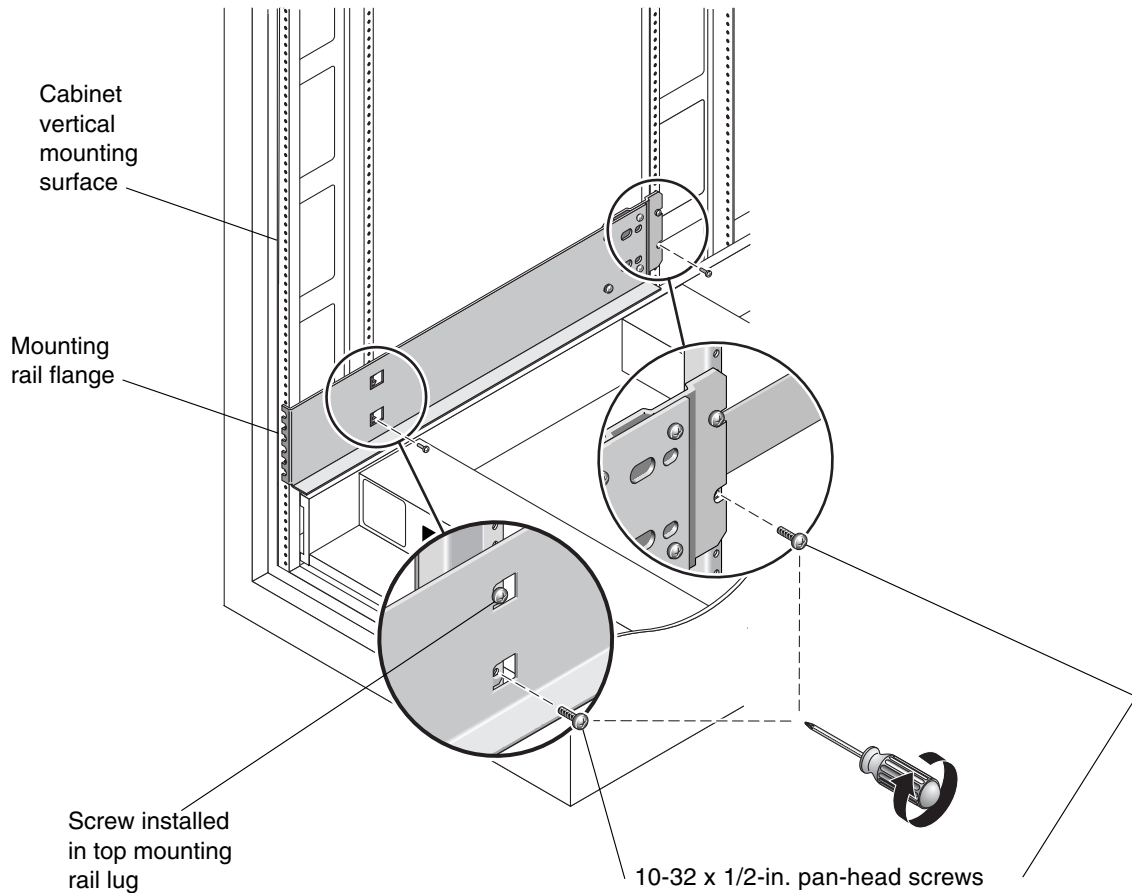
Installing Two Screws Before Installing the Mounting Rail
